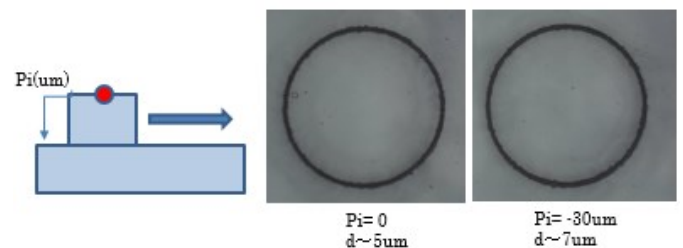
Designed target pattern was successfully machined on the surface of the glass slide.
